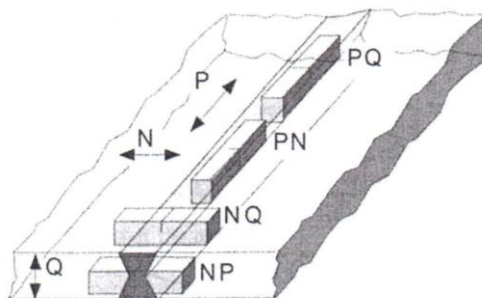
Ranking for specimen outlook regarding the weld axis [3]
